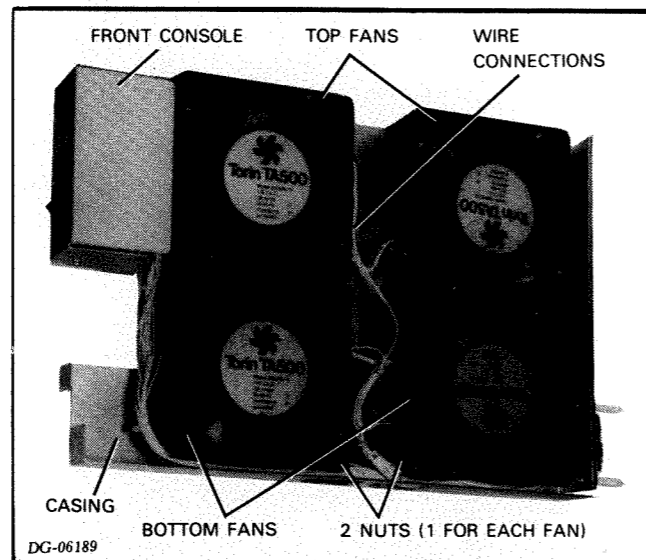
FAN MODULE FOR 16-SLOT CHASSIS (FRONT VIEW)
